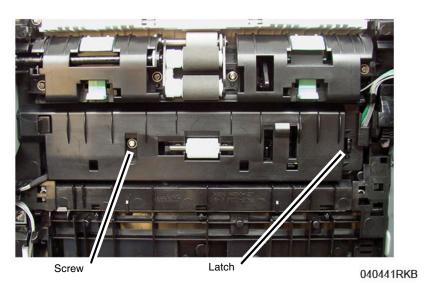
Feed and Reg Sensors PWB Cover (Bottom View)
